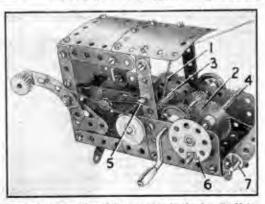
A close-up view of the excavalor showing how the Motor drive is transmitted through the gearing.
